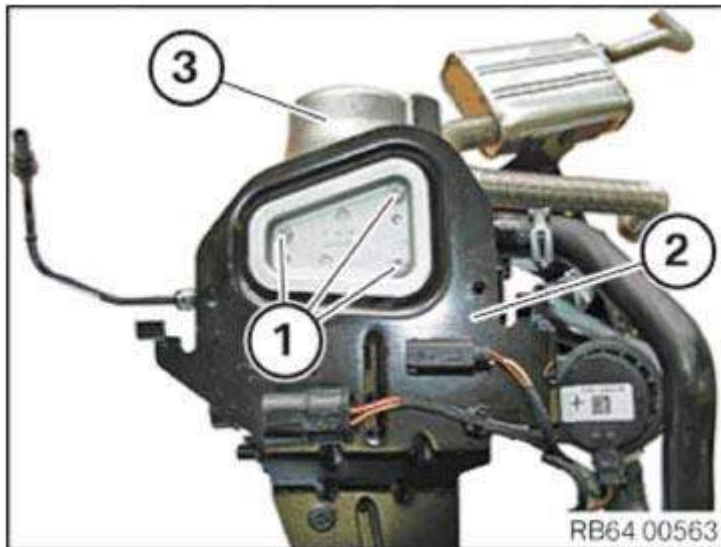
Identifying Holder From Auxiliary Heater And Screws
